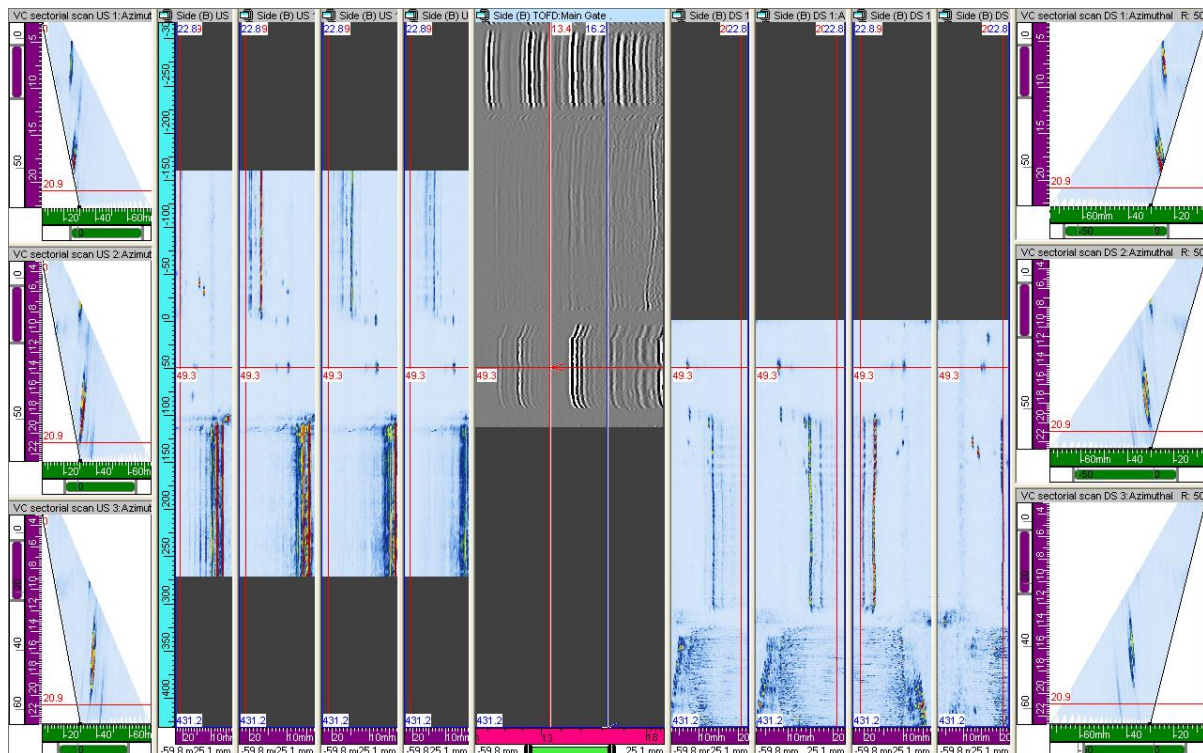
Weld PB 1005 - EWI LPA Calibration Scan Screen Capture
